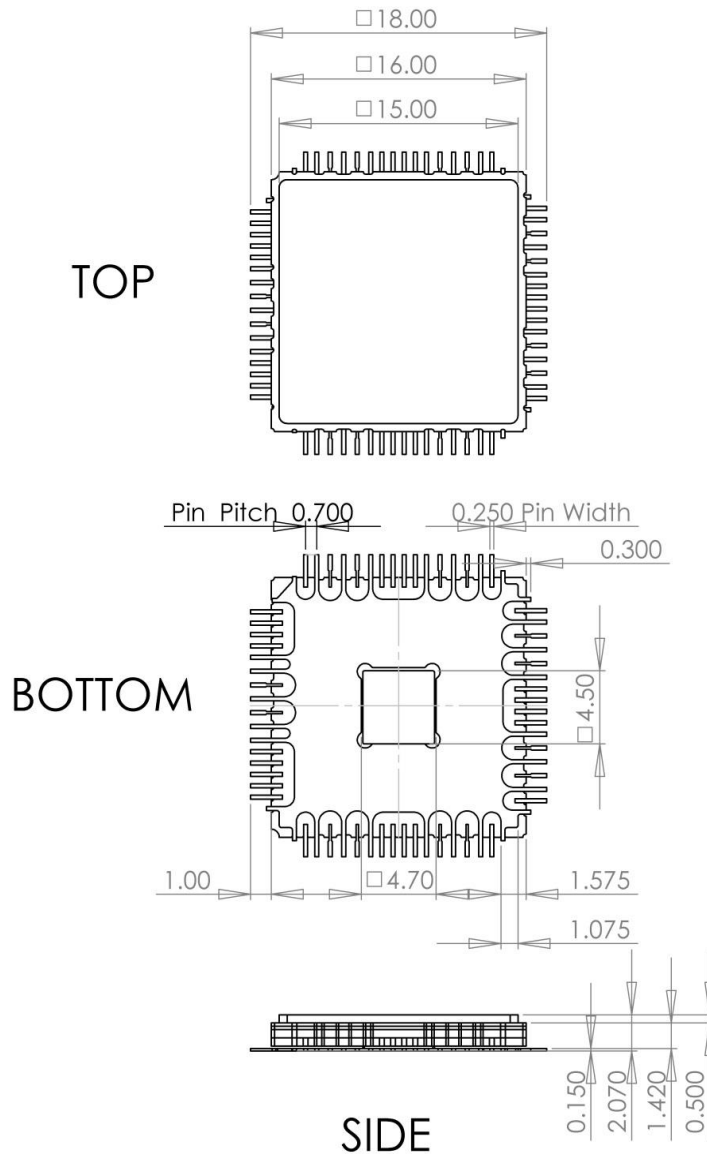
CQFP 64-Pin Package Drawing (All Dimensions in mm)
